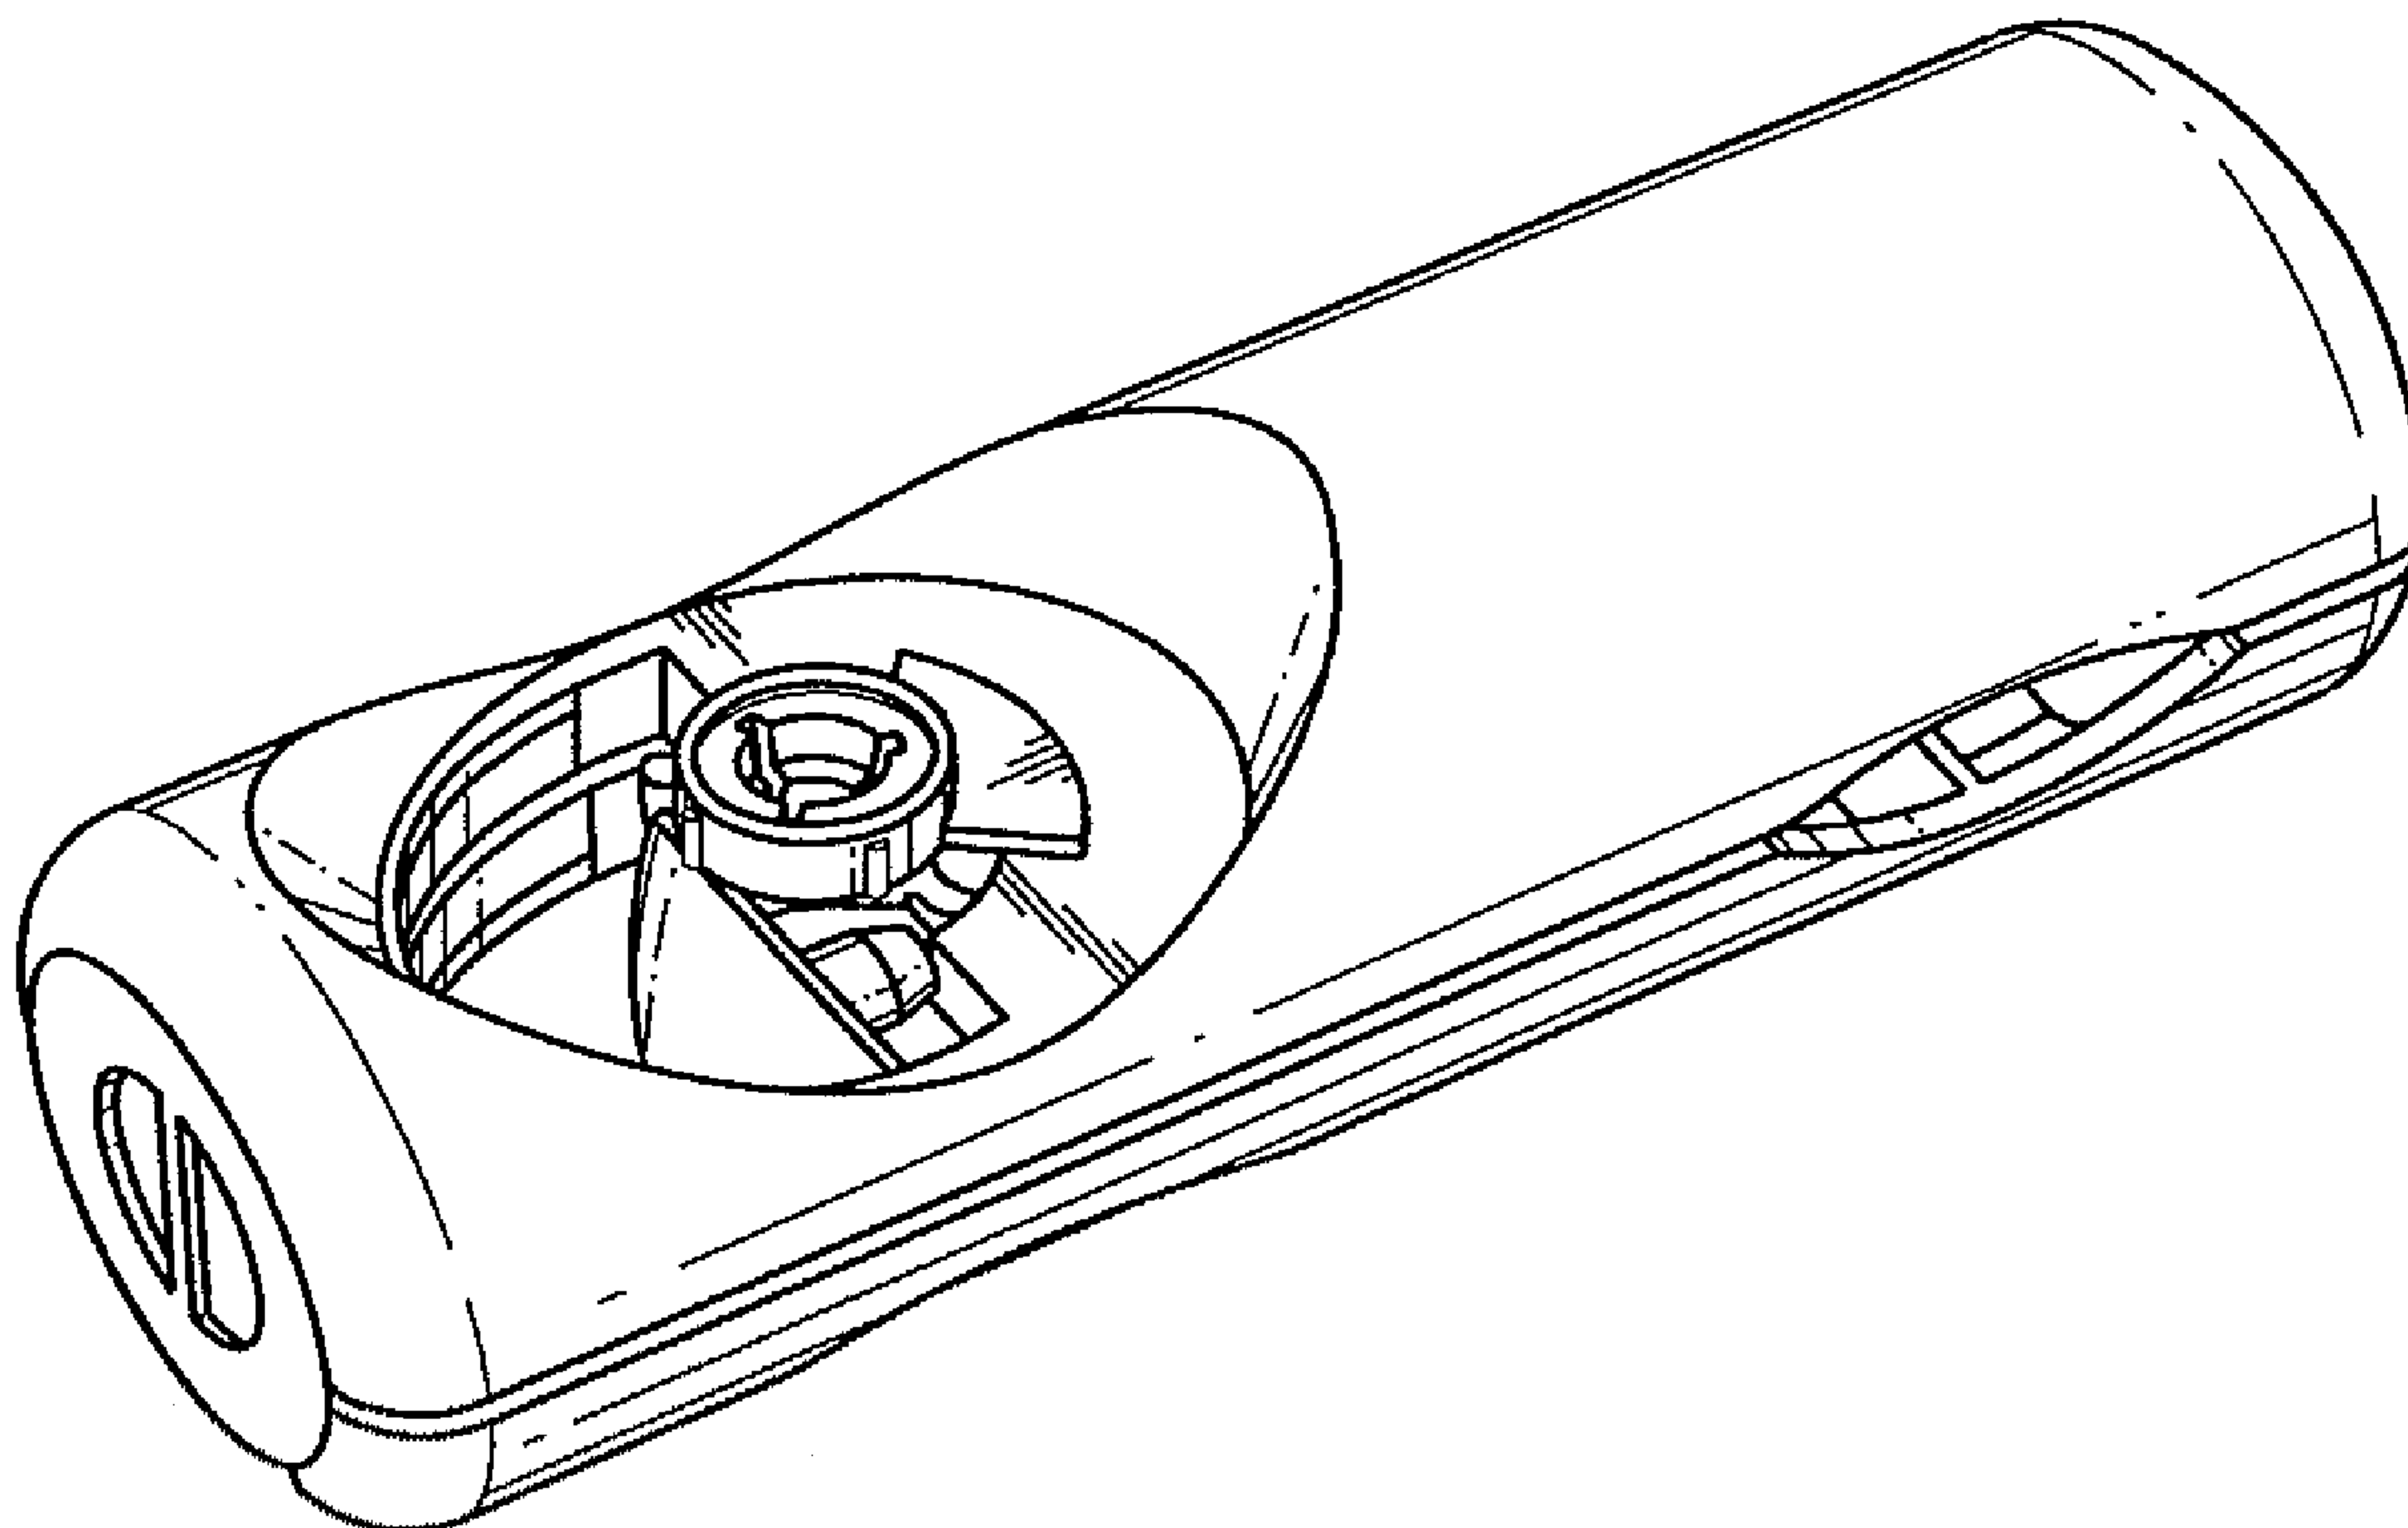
is a bottom rear perspective view in a closed position of the hole punching tool of FIG. 1;
